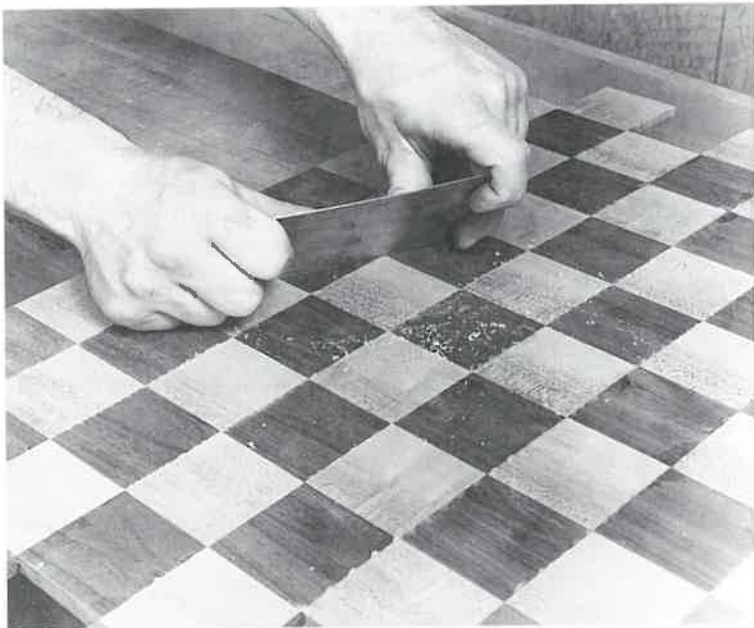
A—Cabinet scrapers are an excellent tool for smoothing the surface of parquet surfaces. (*Butler Specialty Co.*)
